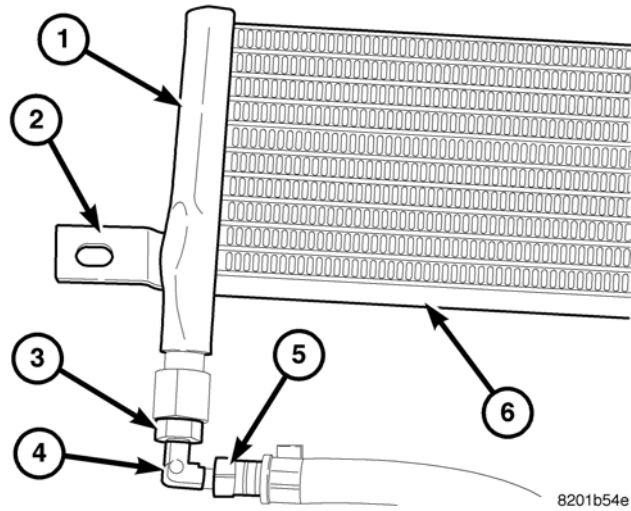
TRANSMISSION COOLER ASSEMBLY - LEFT SIDE
